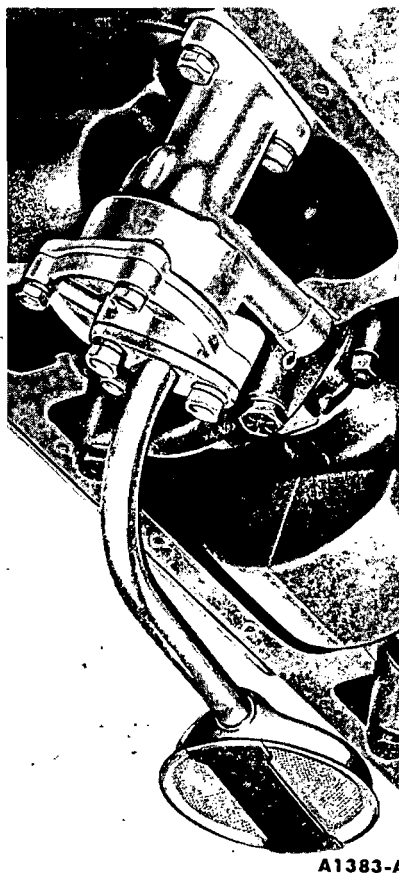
170 Six Oil Pump Inlet Tube Installed
